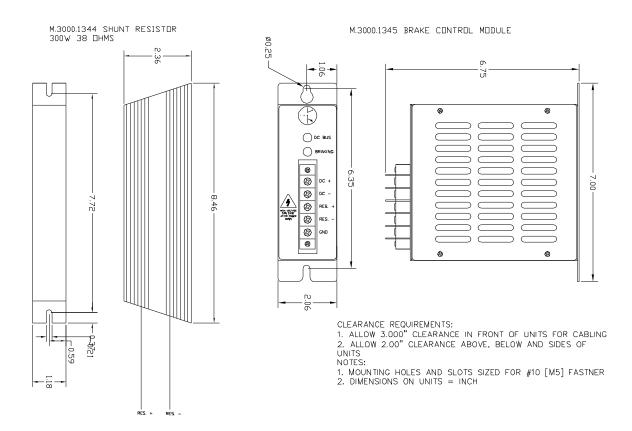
Mounting Dimensions for 460V External Shunt (P/N M.1302.7048)
